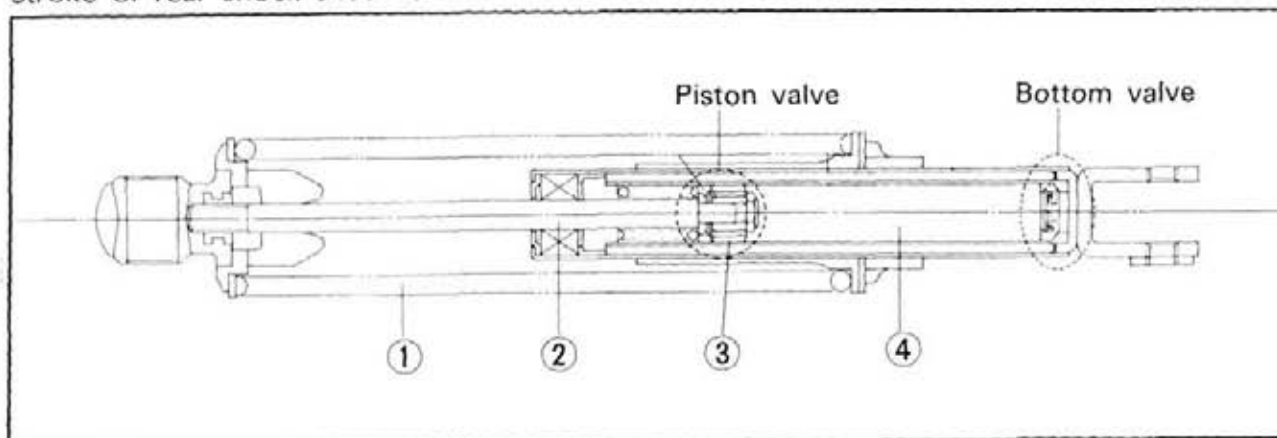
① Rear shock absorber spring ② Damper rod
